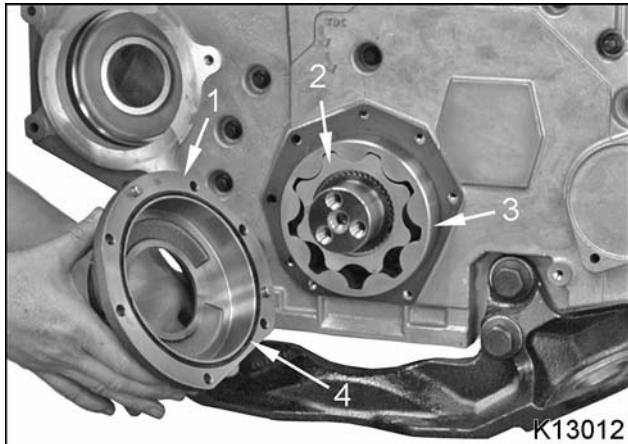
Oil pump housing, rotors, and oil pump (housing) seal
